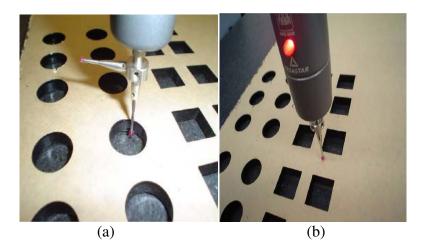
Detail view of CMM probing of laser machined acrylic test pieces.
